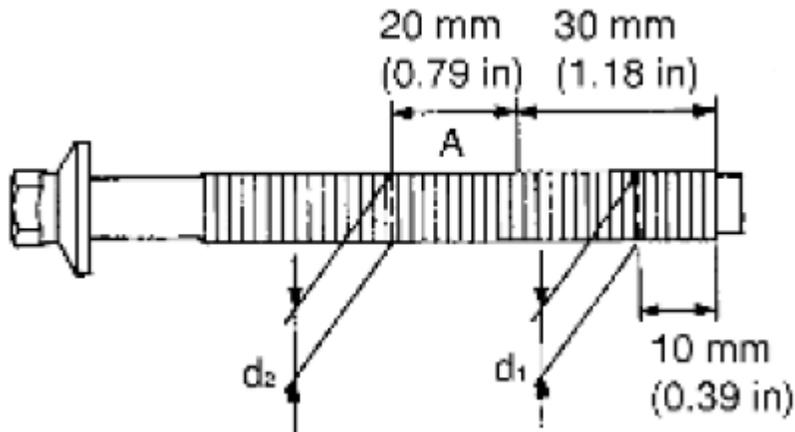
Identifying Lower Cylinder Block Mounting Bolt Outer Diameter
